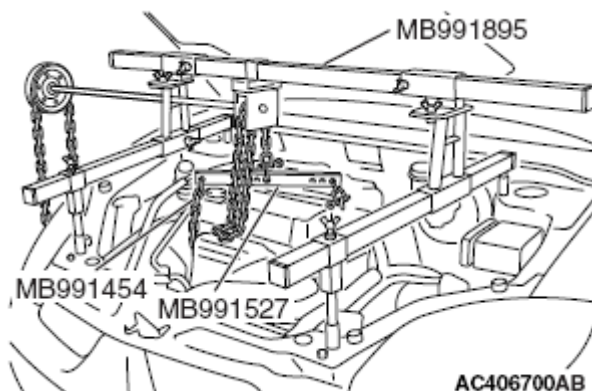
Supporting Engine With Garage Jack Using Special Tool MB991895
